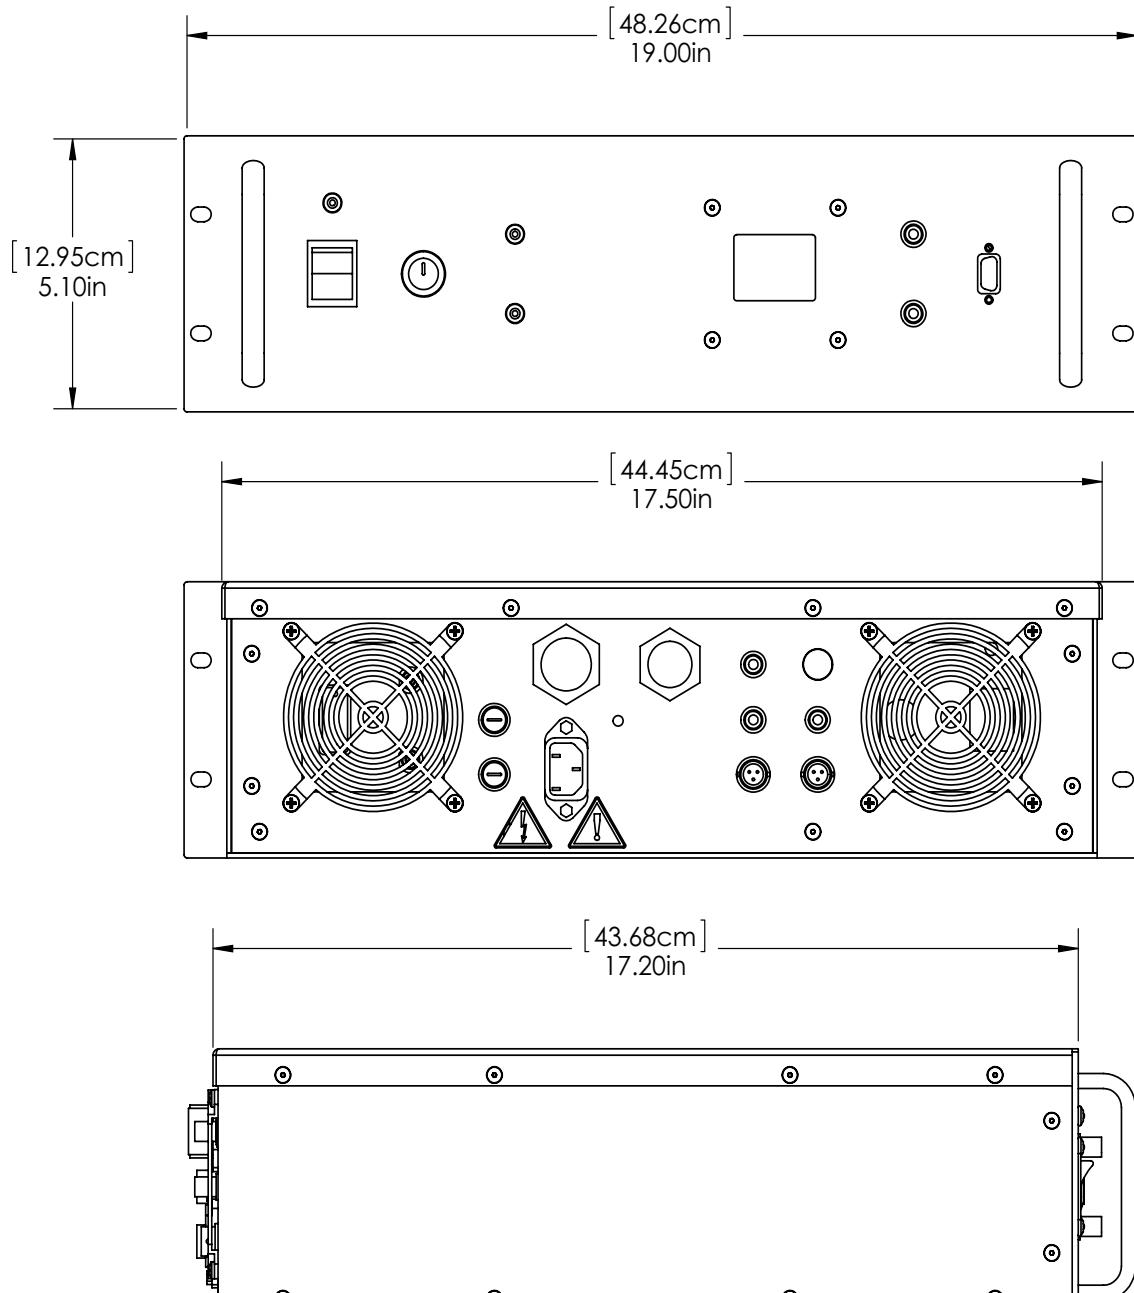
Astrella Optical Bench Assembly & External Component Dimensions (Continued)
